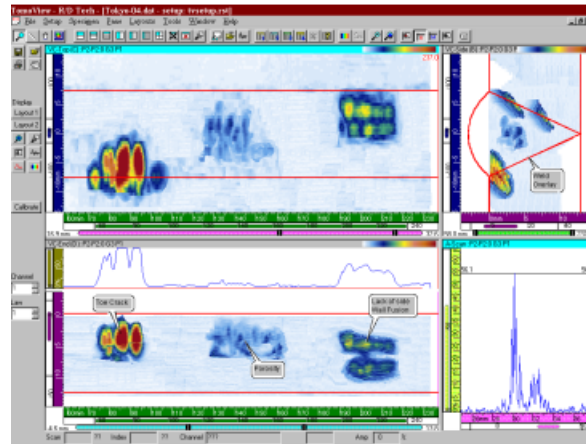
“Top, side, end” view of weld showing defects.
